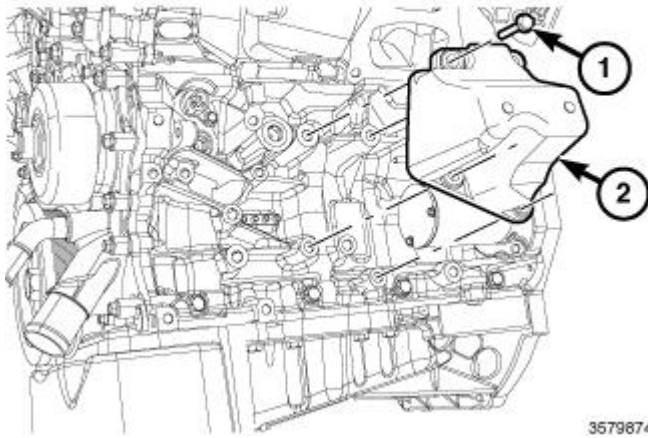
Engine Mounting Bracket & Retaining Bolts
